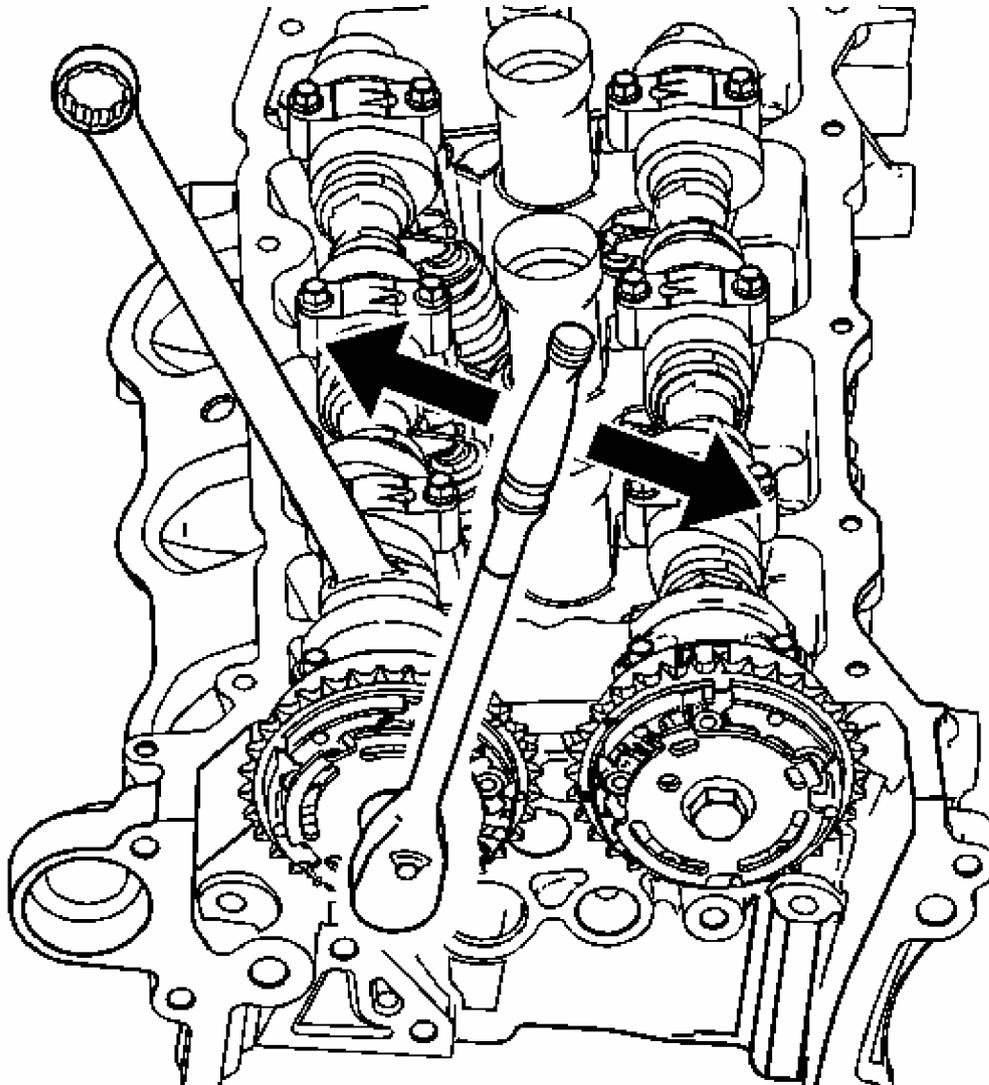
Preventing Camshaft/Engine Rotation Using Open-End Wrench
